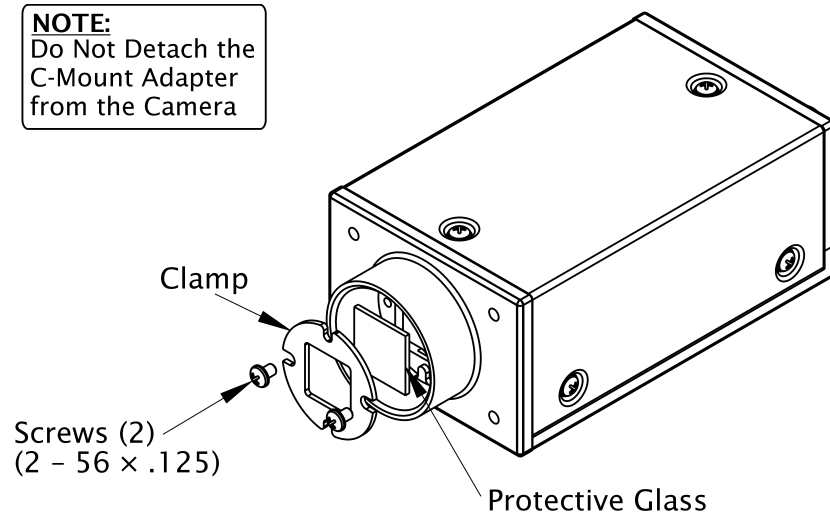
Camera C-Mount, Exploded View (Standard Configuration shown)
